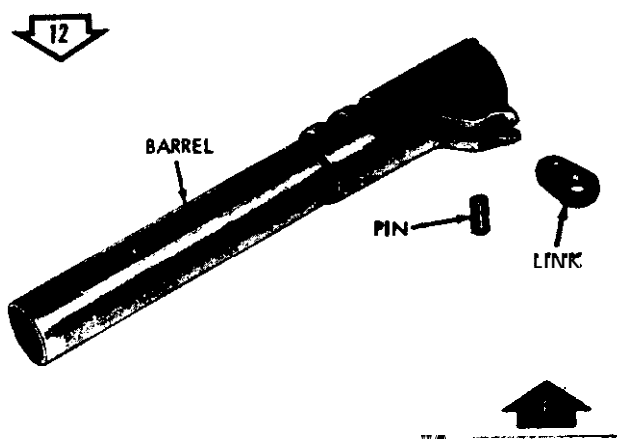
Disassembly/assembly Of barrel and slide group (2 of 4).
